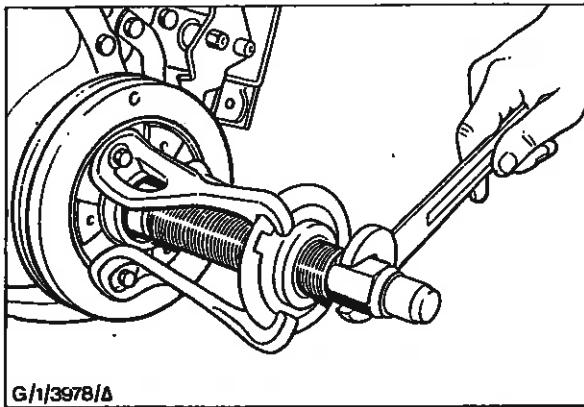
Removing Crankshaft Pulley - All Engines Except 2728T
